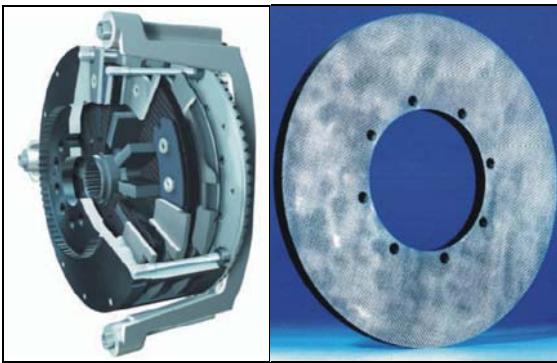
CMC clutch for passenger cars and CMC wheel brake disc for high speed trains [16, 17]
